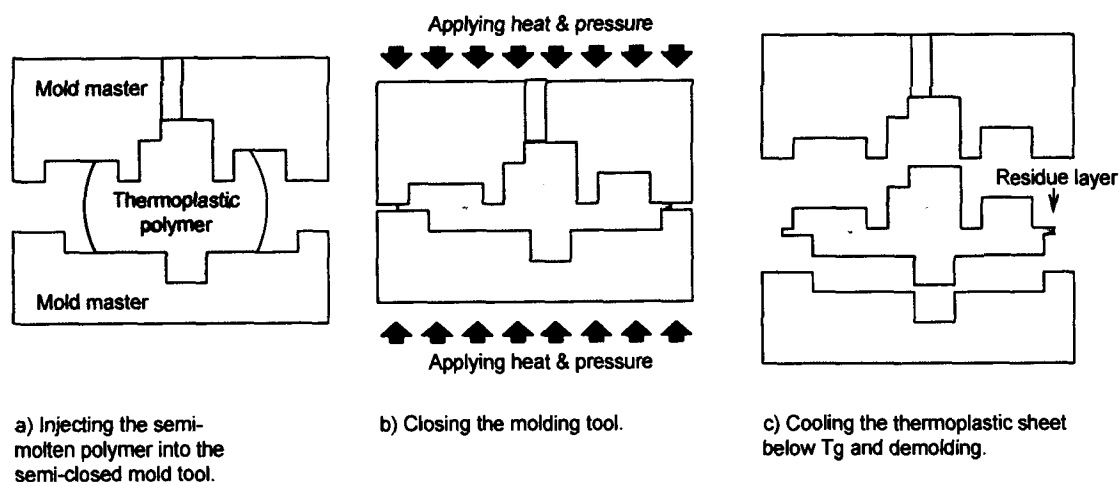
Typical sequence of the injection compression molding: a) semi-closing the mold master, injecting the molten polymer into cavity, b) closing the mold master completely like hot embossing and cooling the polymer below the  $T_g$ , and c) demolding the parts.
